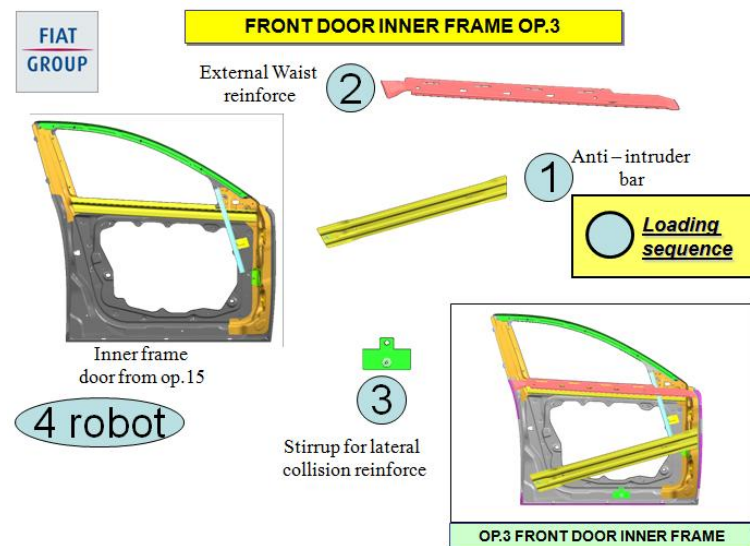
components door loaded on a geometrical gripper for positions maintaining
